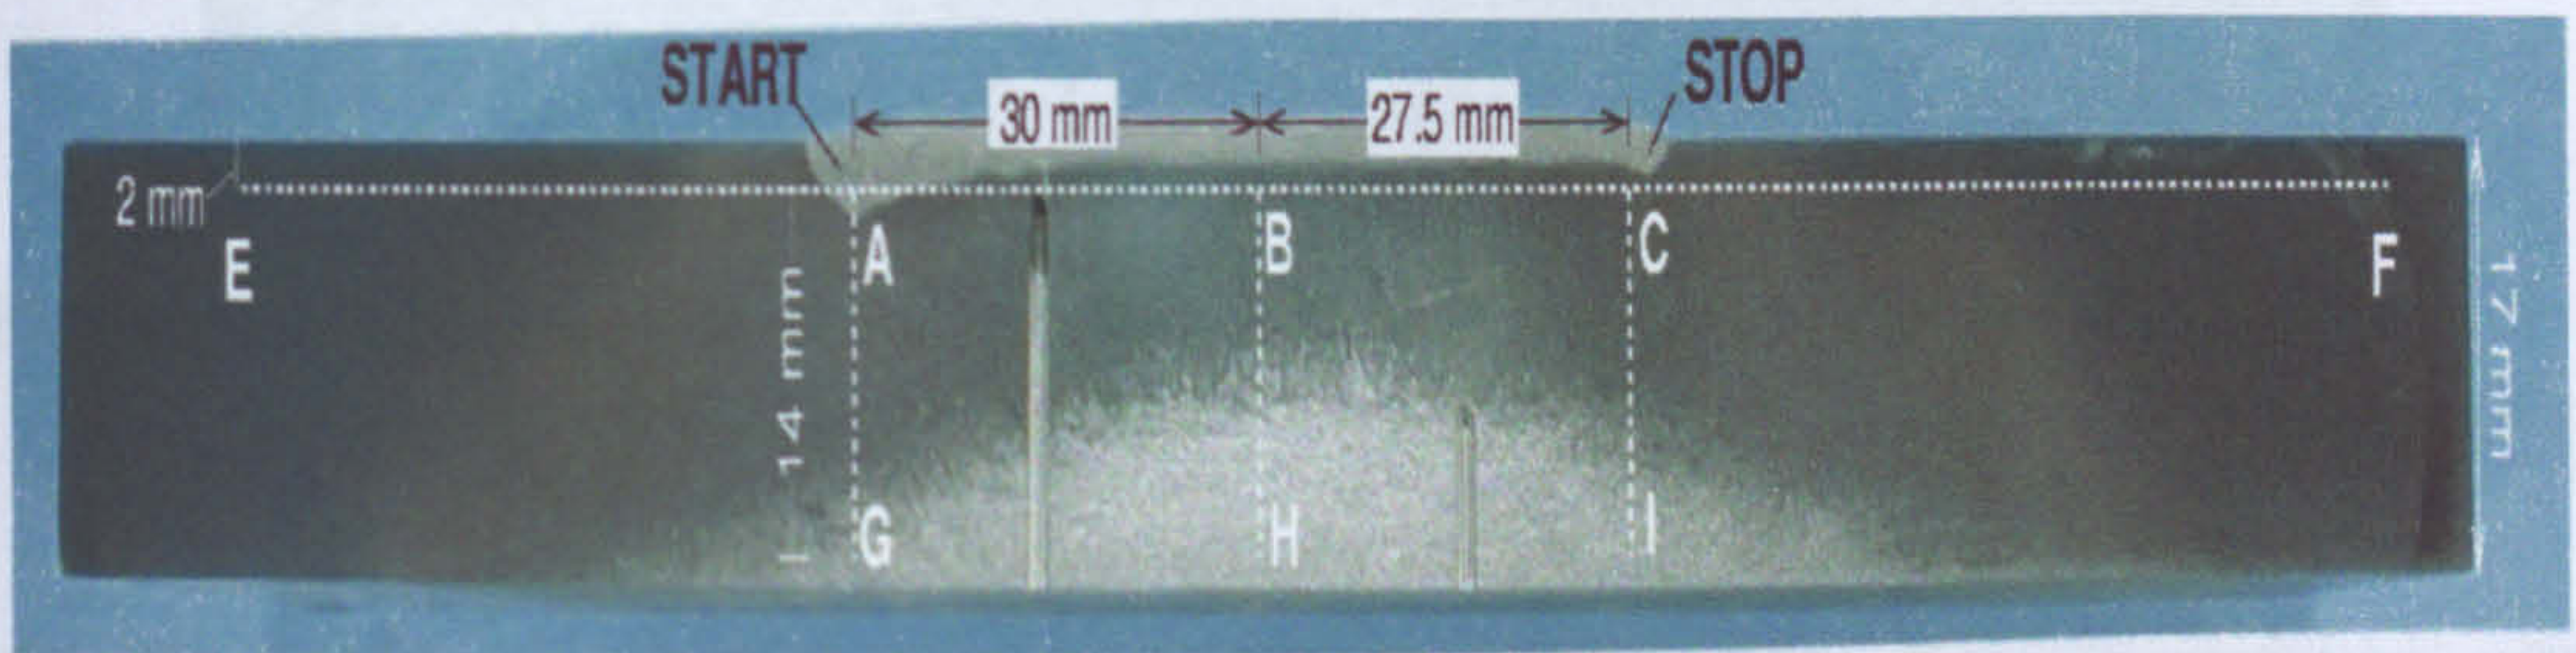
Cross- sectional macrograph of the LD-ND plane of the bead on plate weld.
